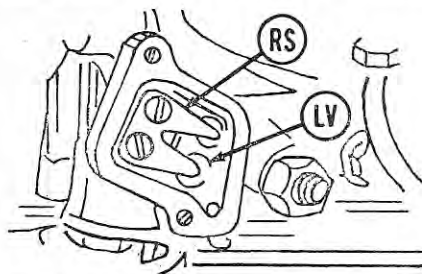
Crankcase bleeder valve used on 22 and 25 horsepower models. The bleeder valve may be serviced without disassembly of power head by removing the valve plate.
